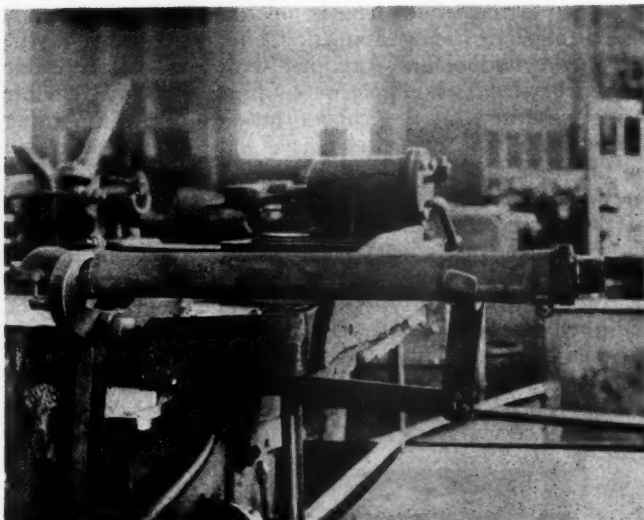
Hose in the clamping machine with the clamp forced into a closed position ready for the bolt
